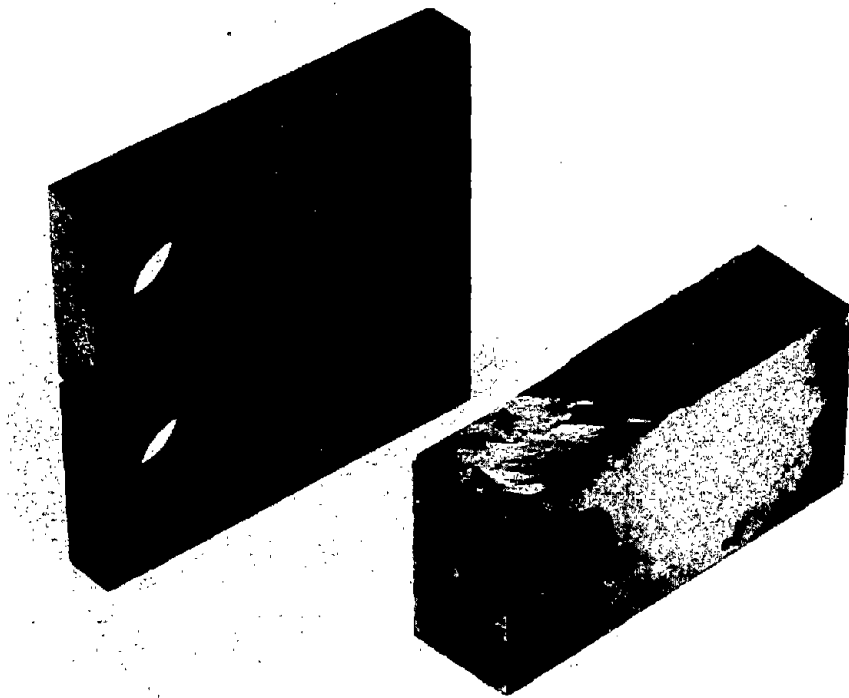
COMPACT TENSION SPECIMENS BEFORE AND AFTER TESTING
